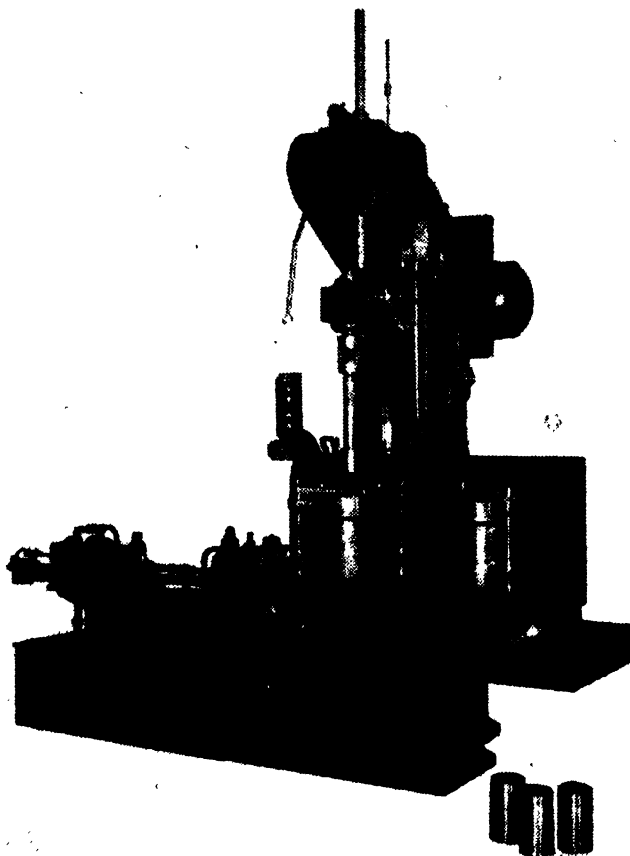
Number 15 single-spindle hydraulic hone. (*The Moline Tool Co., Moline, Ill.*)
